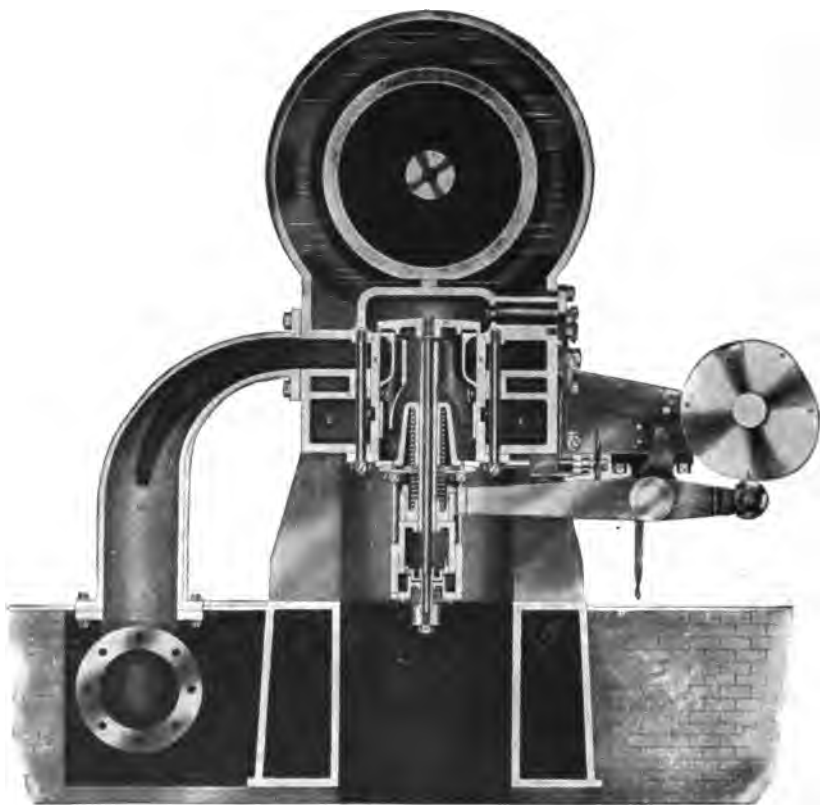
Transverse Cross-section Sargent Engine.
